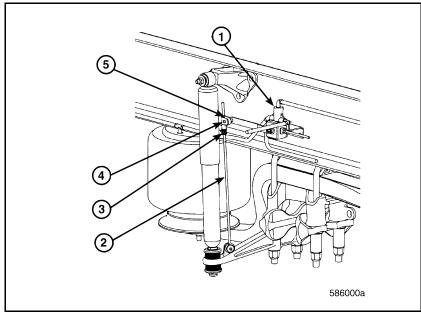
Height-Control Valve with Rubber Rod Ends (AL-405)
